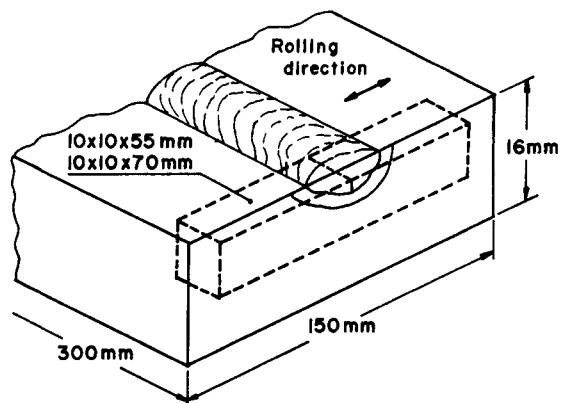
Welding plate configuration and extraction of specimen
